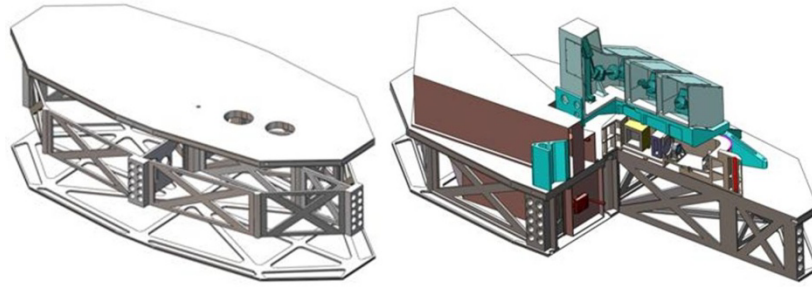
Details of modular optical bench. Left-hand image shows three-piece modular assembly and right-hand image shows installation arrangement of main optical subcomponents.
